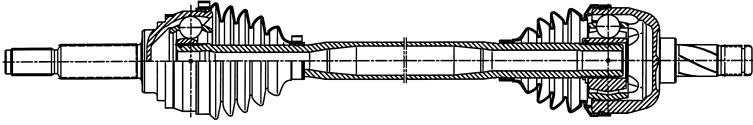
Front-wheel output shaft of GKN Automotive. A constant-velocity sliding joint is used on the gearbox side and a constant-velocity fixed joint is used on the wheel side (Fig. 1.17). The maximum bending angles are 22° for the sliding joint and 47° for the fixed joint. For reasons of weight, the sliding joint is placed directly into the differential and fixed axially by a circlip. A central nut secures attachment on the wheel side. The intermediate shaft is designed as a carburized, shaped hollow shaft.
